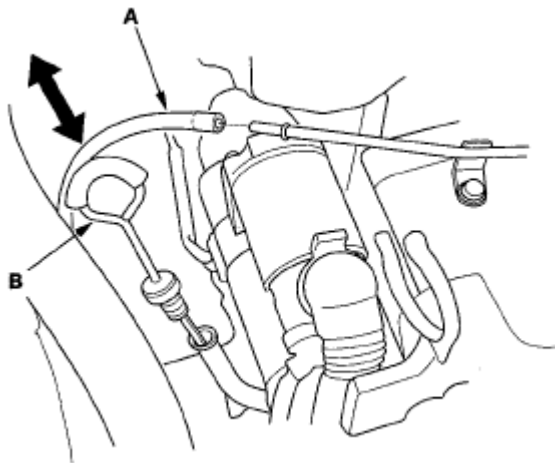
Removing Vacuum Hose And Transmission Dipstick
